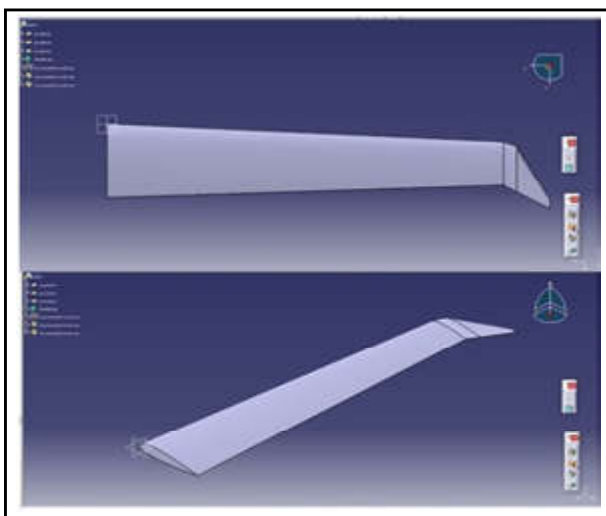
CAD Model of Wing with Raked Wingtip (Top & Isometric View)
